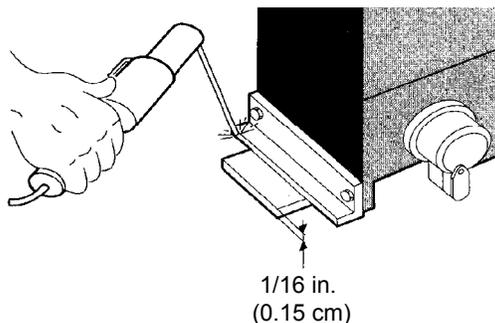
Spot weld the mounting brackets to the foundation plate
